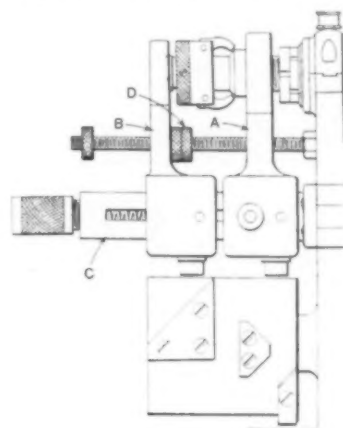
STOCK-FEED MECHANISM OF THE "EMPIRE" AUTOMATIC SCREW MACHINE
